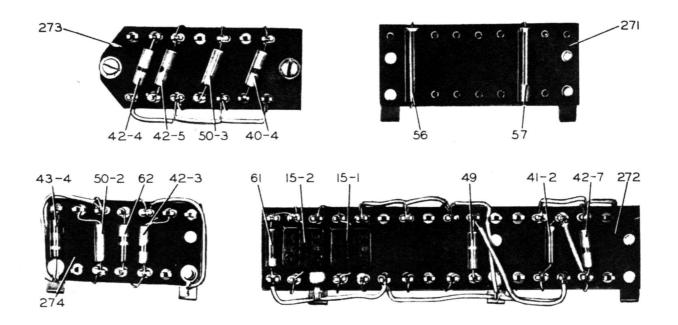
RADIO RECEIVER BC-348-B: RESISTOR BOARDS, VIEW A
